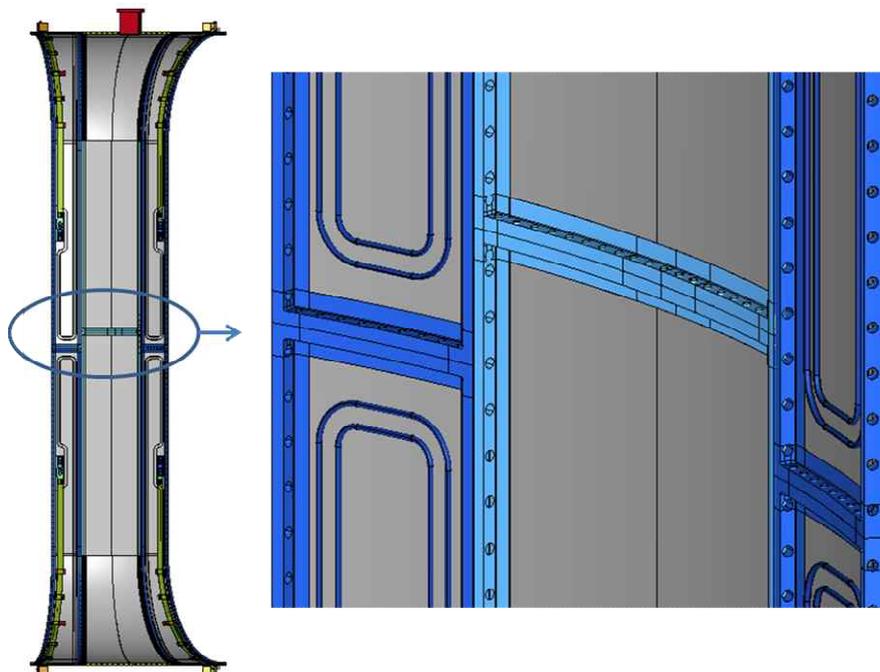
Design of the bisecting joint for VVTS inboard 10 degree.
